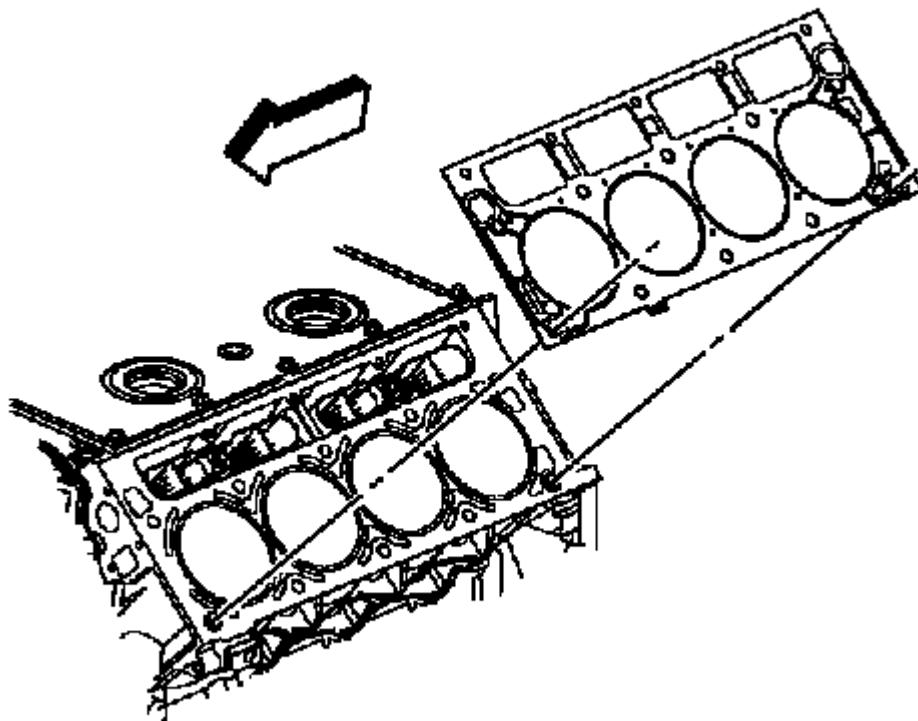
View Of Left Cylinder Head Gasket & Locator Pins
